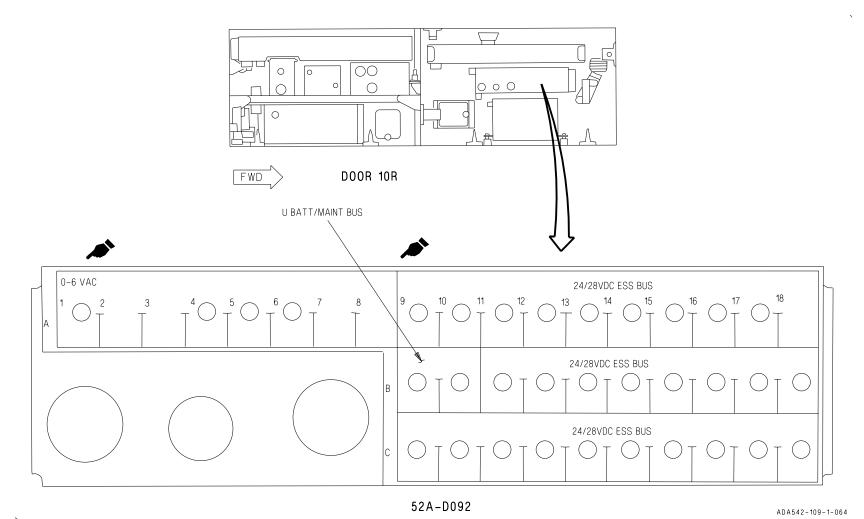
No. 5 Circuit Breaker Panel Assembly - 52A-D092 (Sheet 1)
